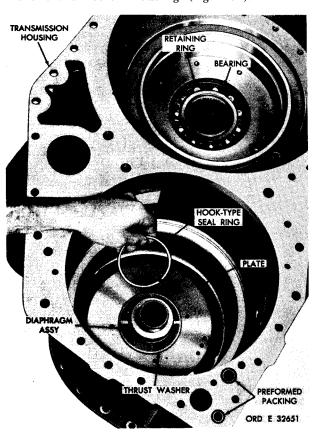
Removing hook-type seal ring from hub of diaphragm assembly
